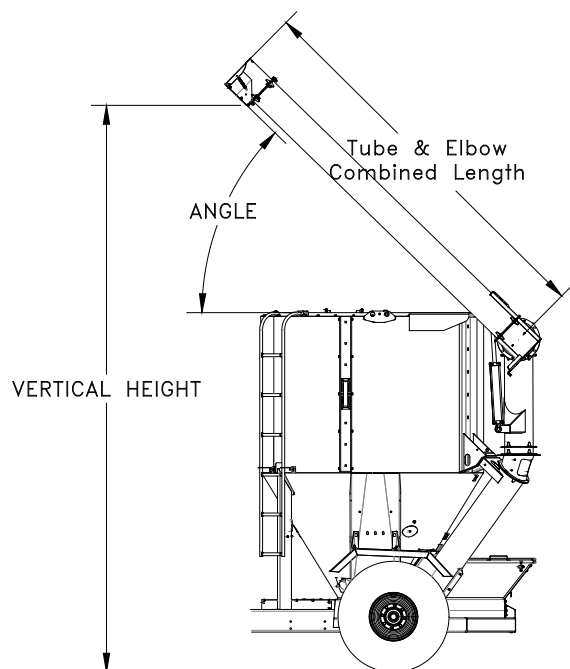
Unloading Auger Heights (Refer to Table 4 for Detailed Heights.)
